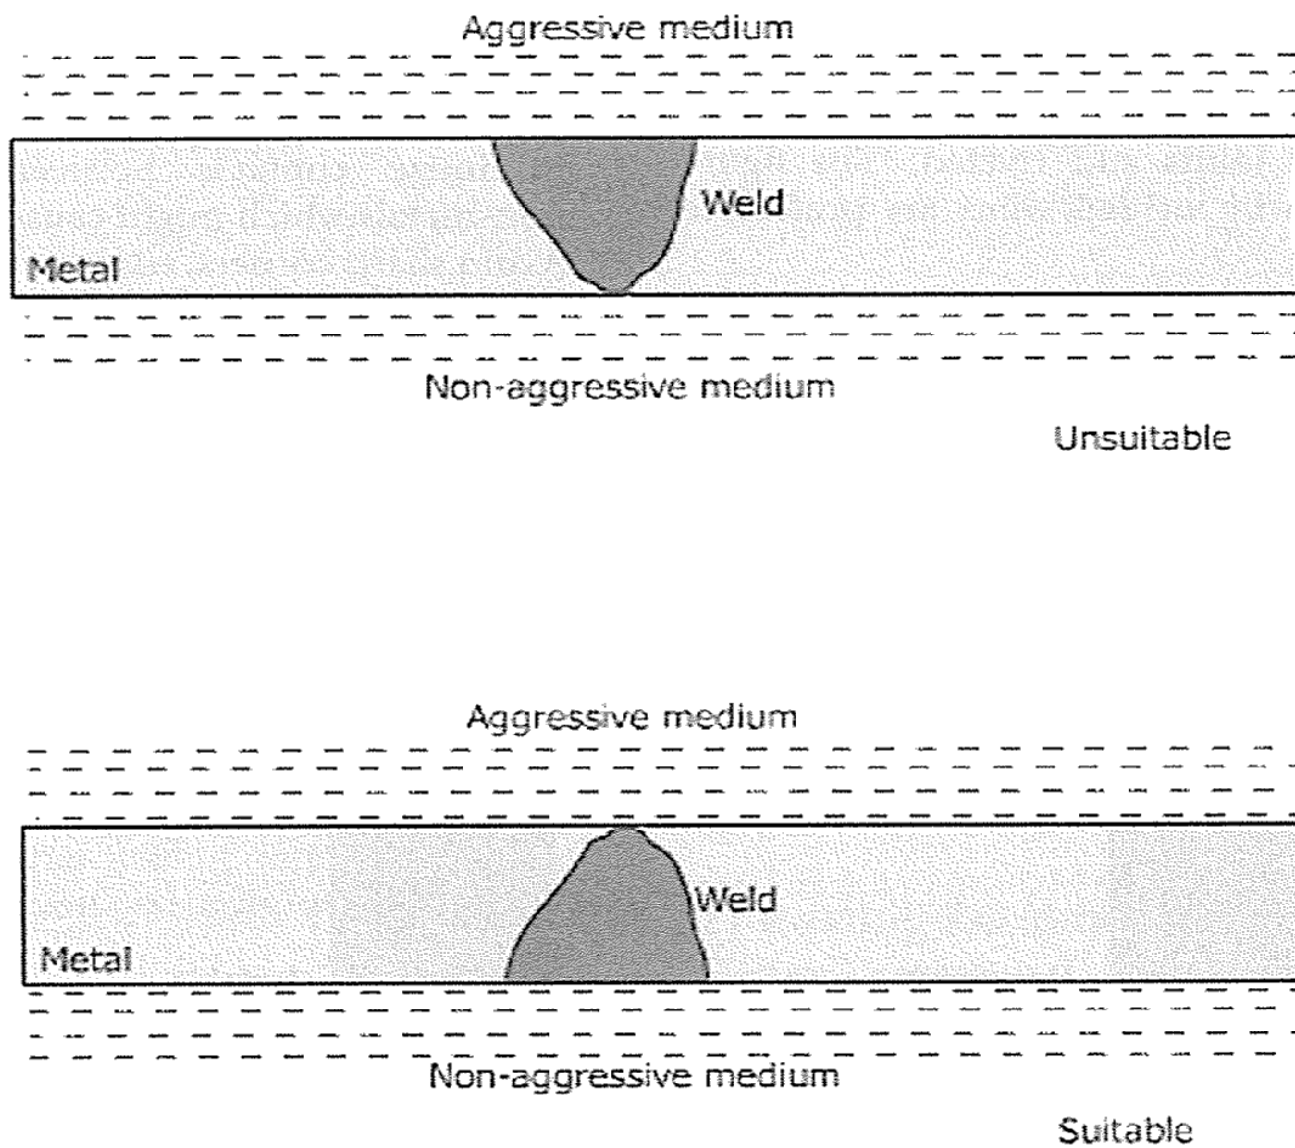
The smaller side of the weld should be turned towards the aggressive medium
